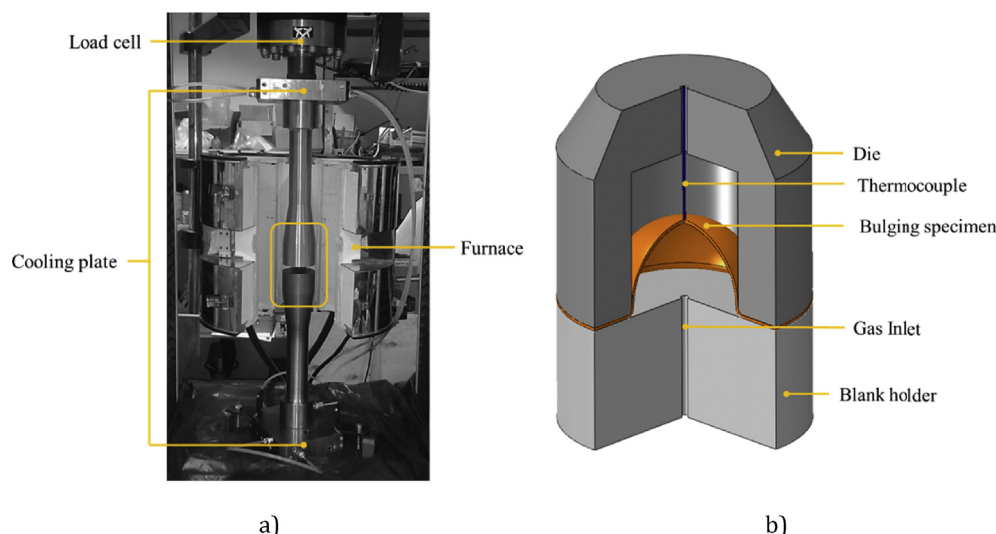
Laboratory scale equipment for free-inflation tests: a) main components, b) details of the forming chamber.
